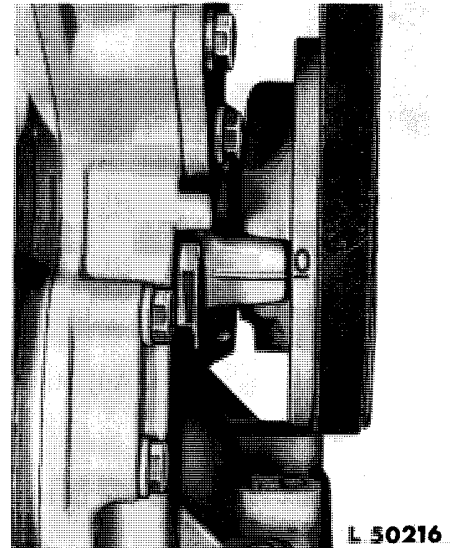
Indicator on Timing Gear Housing and Adjusting Marks on Crankshaft Pulley.
